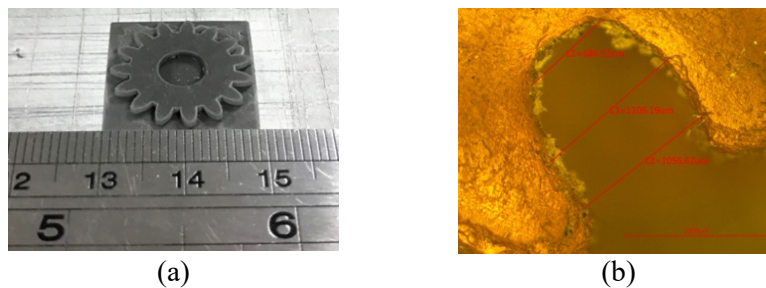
The printed spur gear (a) and tooth observation (b) of sintered part
